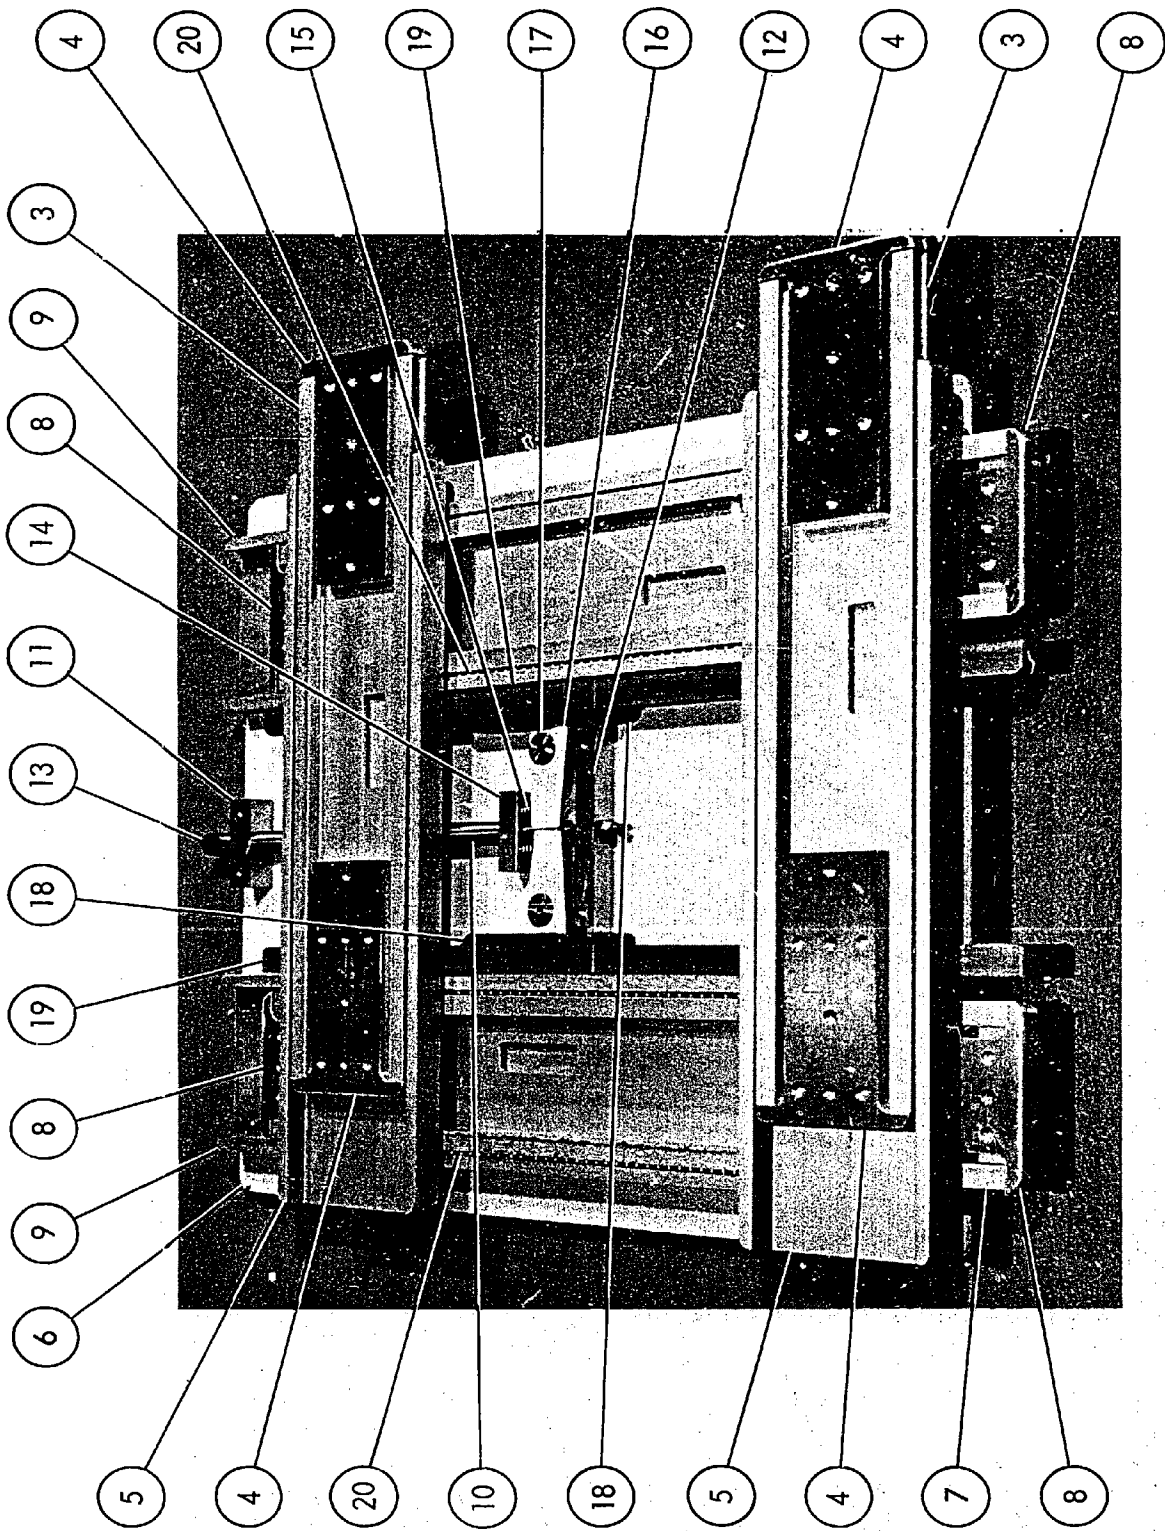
X-Y Platform lying on its working surface. The base plate has been removed to show details of braking system and drawer slide construction.
